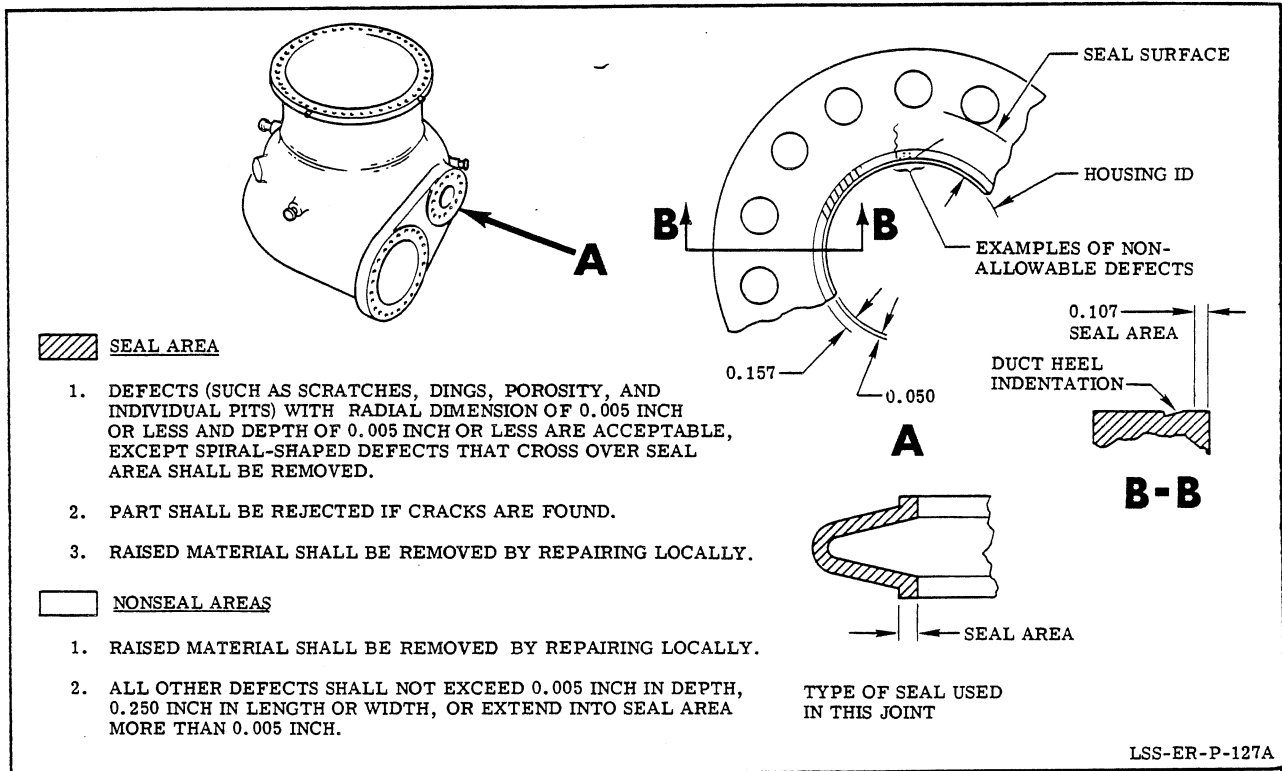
LPOTP Housing RS007802 Turbine Drive Inlet Seal Surface Inspection Guide (Joint 05)
